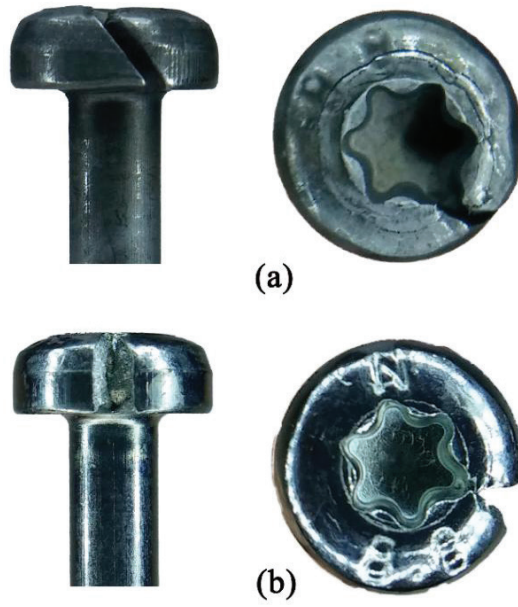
Fracture types on M5 bolts; (a) Inclined and (b) straight fractures.
